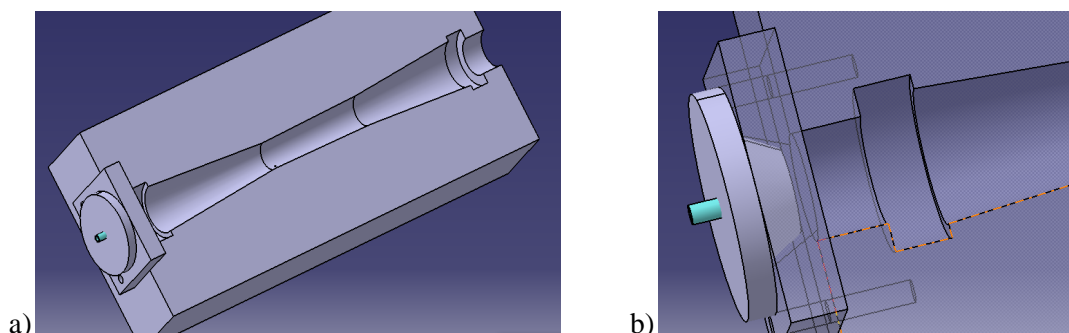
a) the mold, b) zoom of the edge head.
